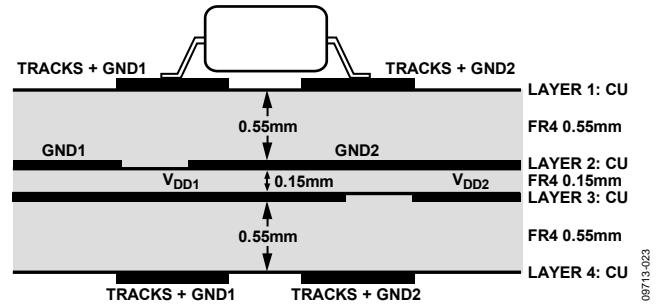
Cross Section of Gap Board Layout of ADuM1xxx with Dielectric of 0.15 mm Showing GND Layer 2 and V_{DD} Layer 3
